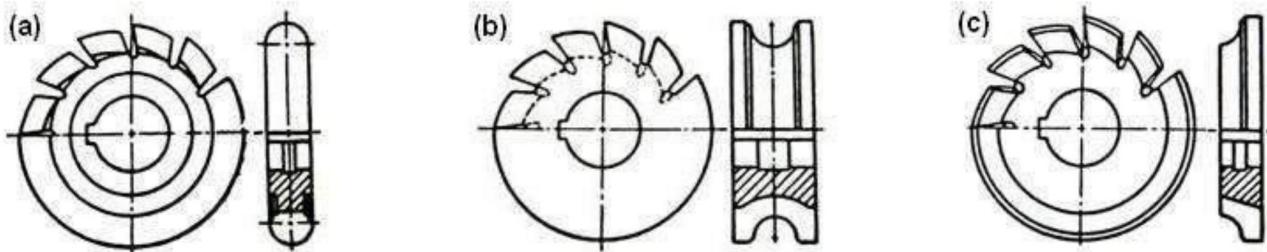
(a) Convex milling cutter (b) Concave milling cutter and (c) Corner rounding milling cutter
